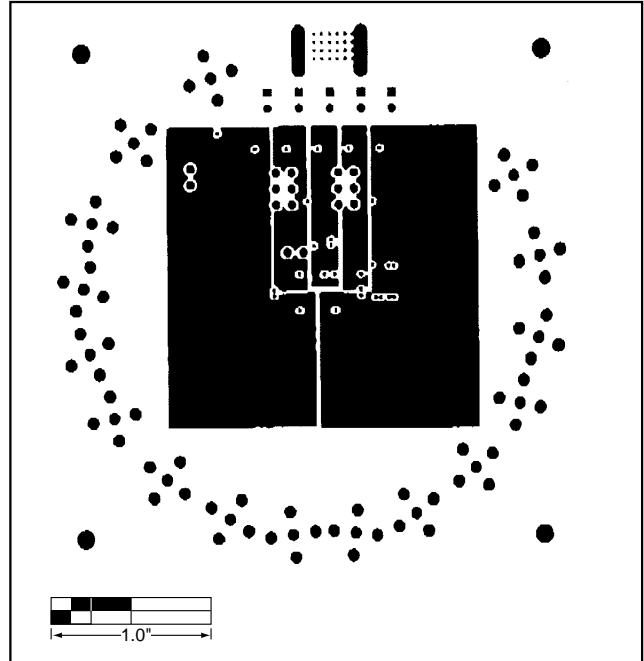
MAX3693 EV Kit PC Board Layout—Power Plane
